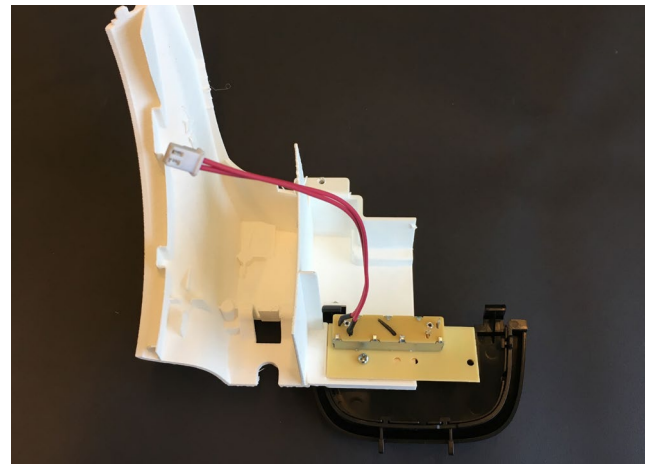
Testing part of the new design of the rear housing with the top ABS cover and power slider
